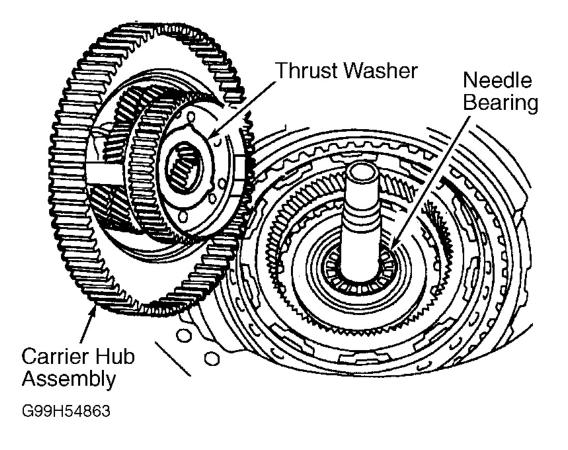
Installing Carrier Hub Assembly Into 3-4 Clutch Courtesy of FORD MOTOR CO.
